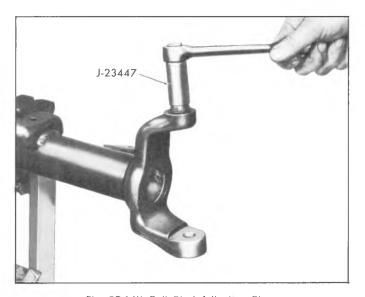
C-14K--Ball Stud Adjusting Sleeve
